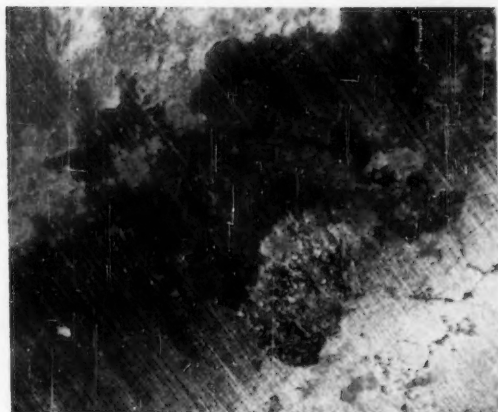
Stress-corrosion cracking of type 304 stainless steel specimen exposed to calcium silicate insulation at 100 C.
